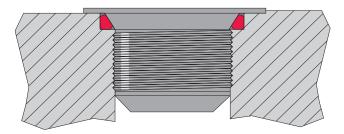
, O-rings for Straight Thread Tube Fitting Bosses
